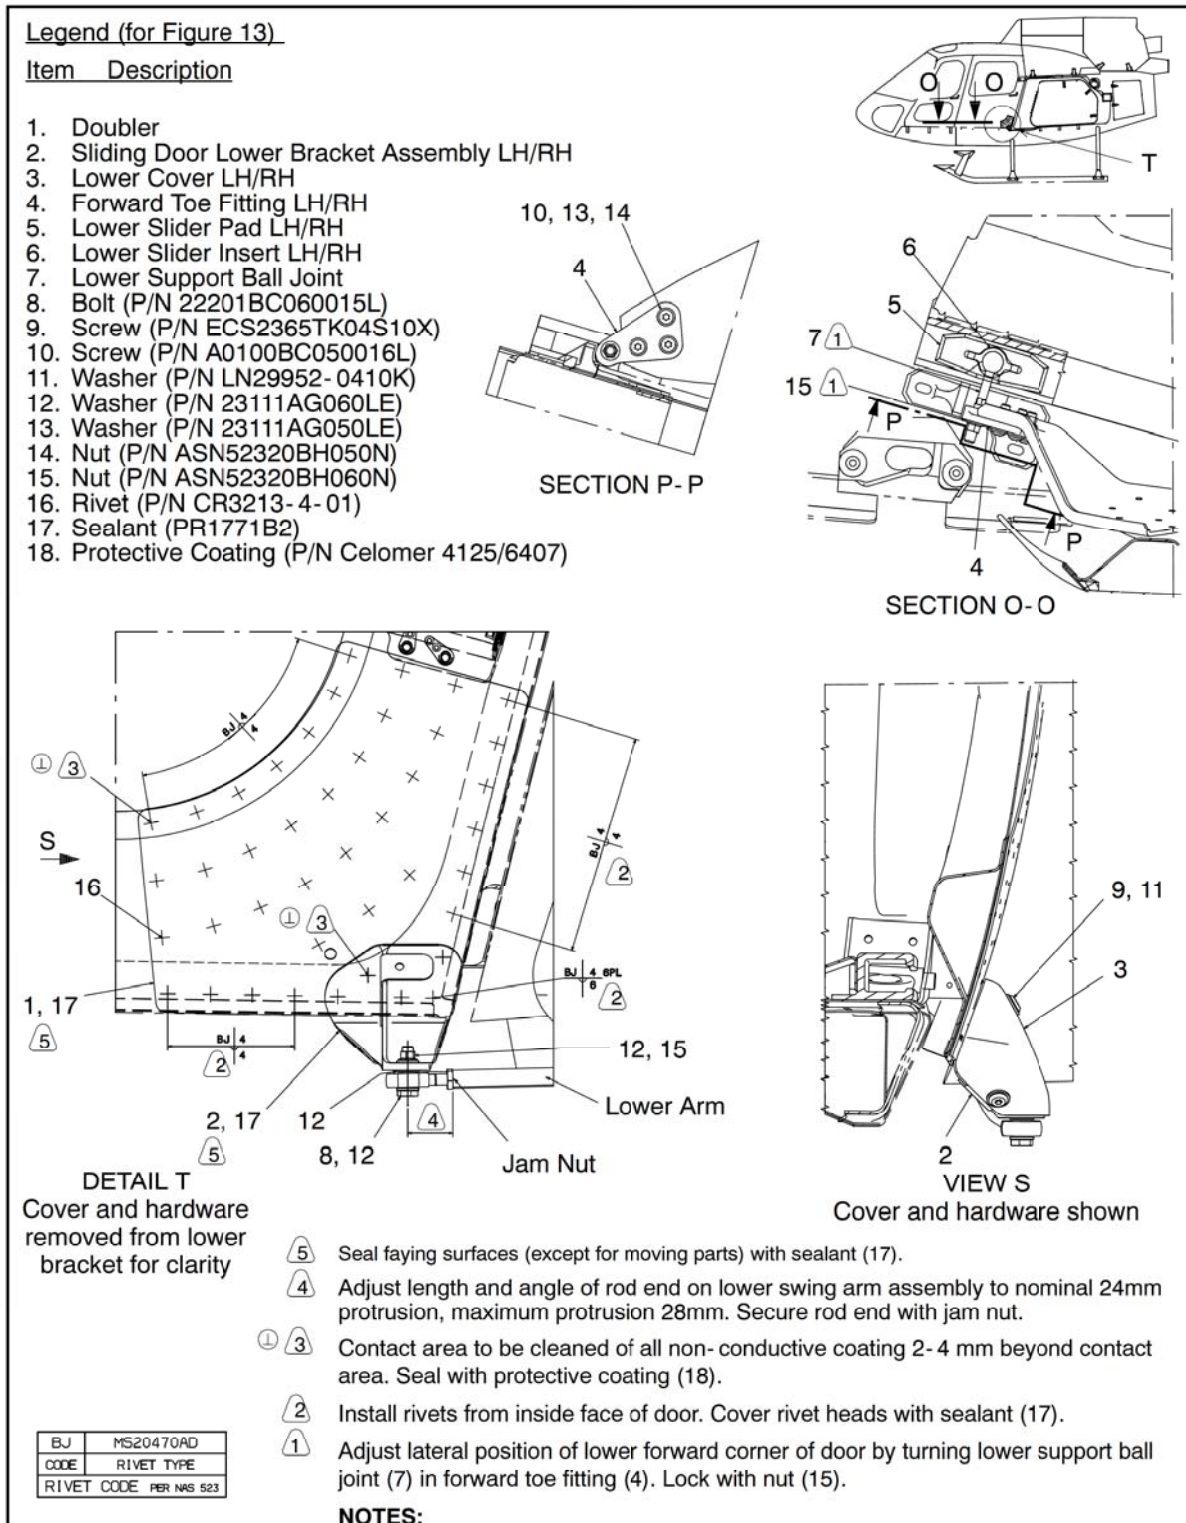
Sliding Door Installation - Sliding Door Lower Brackets
